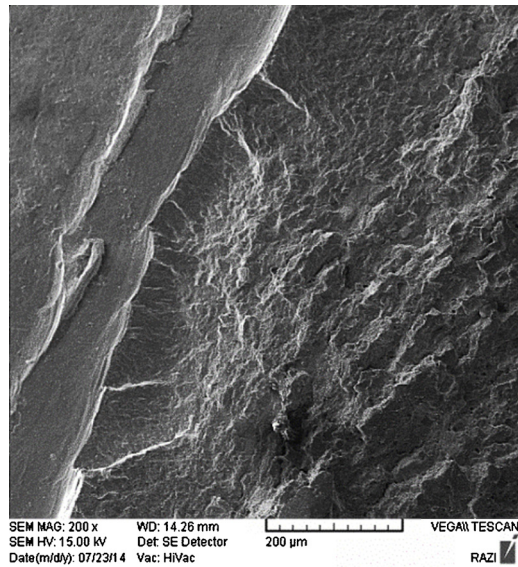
SEM micrographs of the preliminary cracks on the fracture surface edge.
